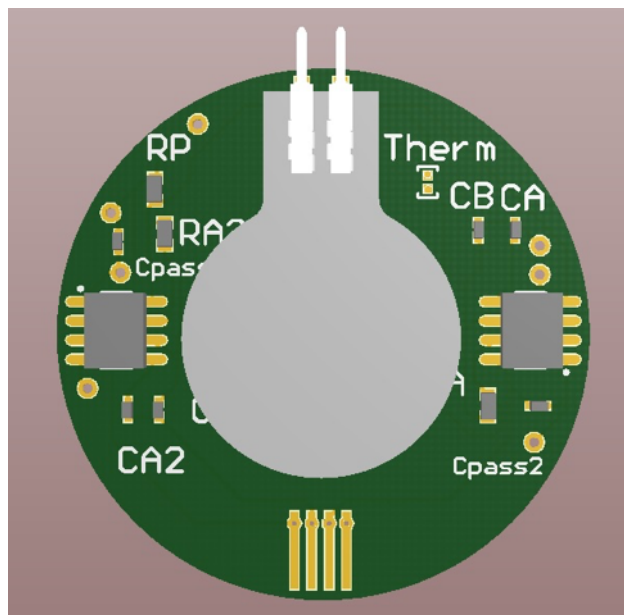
Flex PCB Prototype 3D Rendering
